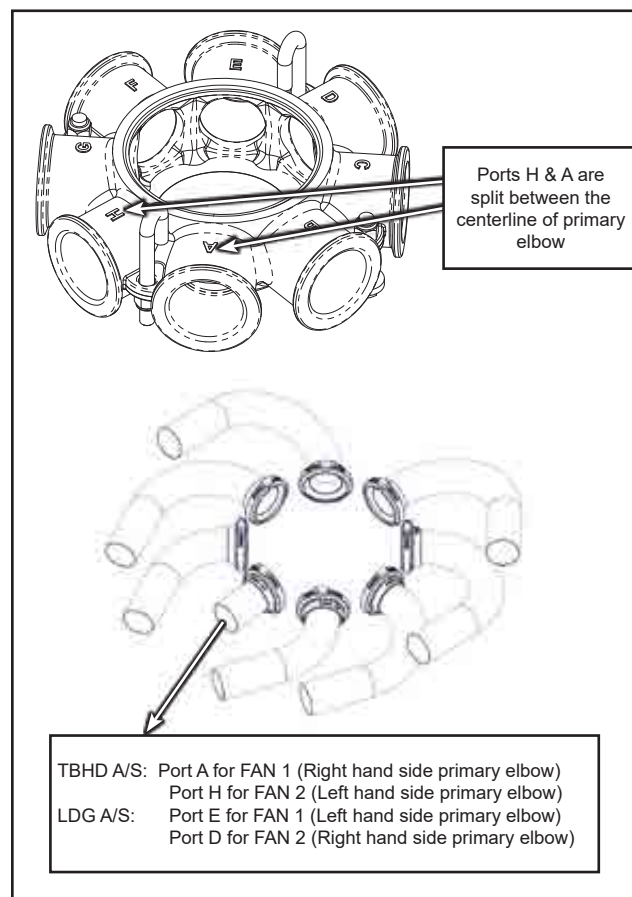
Primary Manifold Head & Elbows - 8 Port
